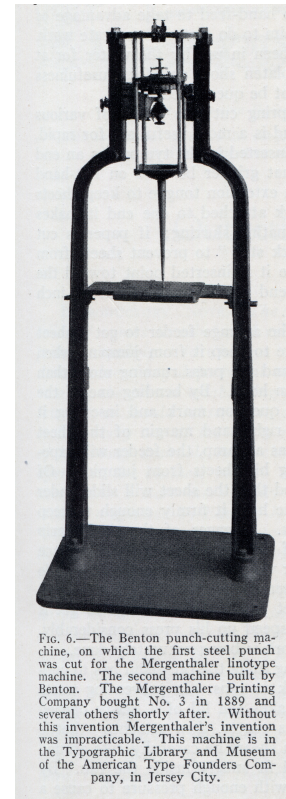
The Benton punch-cutting machine, on which the first steel punch was cut for the Mergenthaler linotype machine. The second machine built by Benton. The Mergenthaler Printing Company bought No. 3 in 1889 and several others shortly after. Without this invention Mergenthaler's invention was impracticable. This machine is in the Typographic Library and Museum of the American Type Founders Company, in Jersey City.
